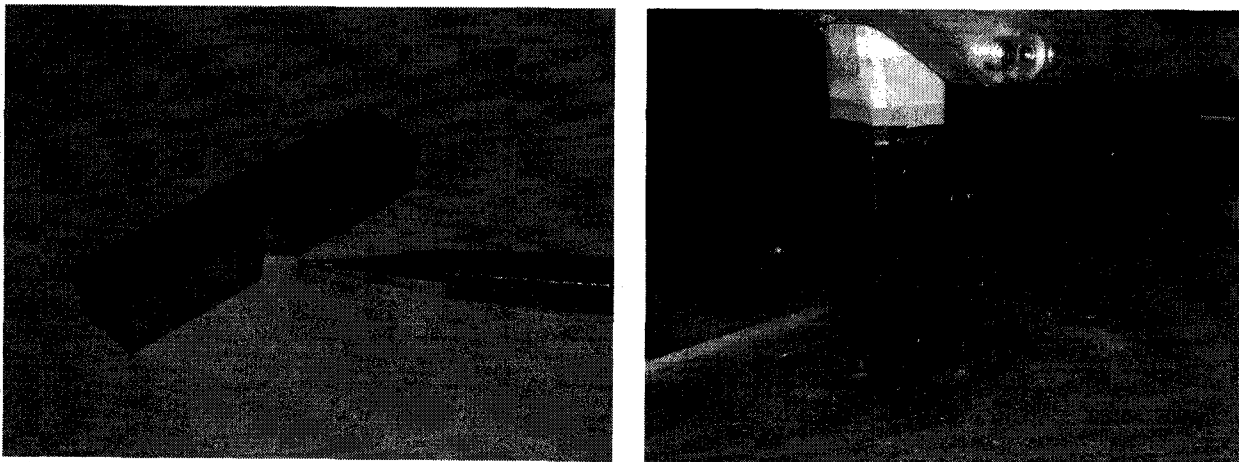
ASTM F519 (type 1e) single notch bend square bar. Right hand image shows the specimen mounted in the test fixtures.
